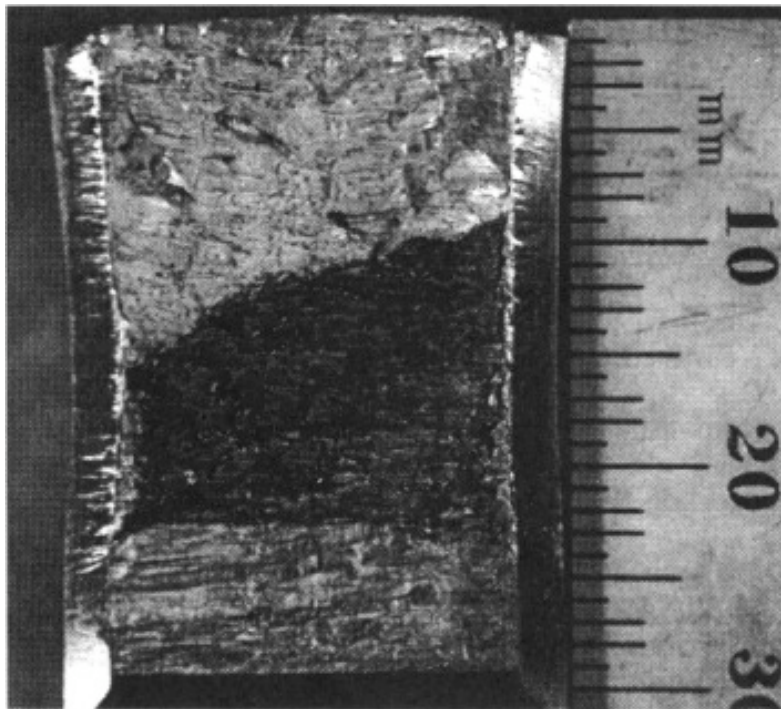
Fracture surface of unaged weld metal PWWO tested at 290°C
